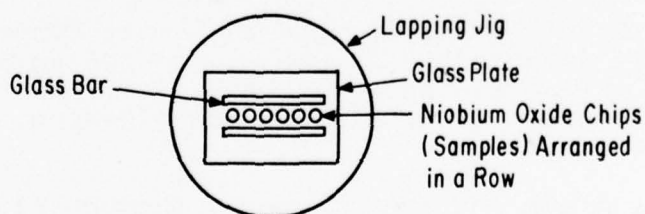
Schematic drawing of sample holder used in grinding and polishing step.
